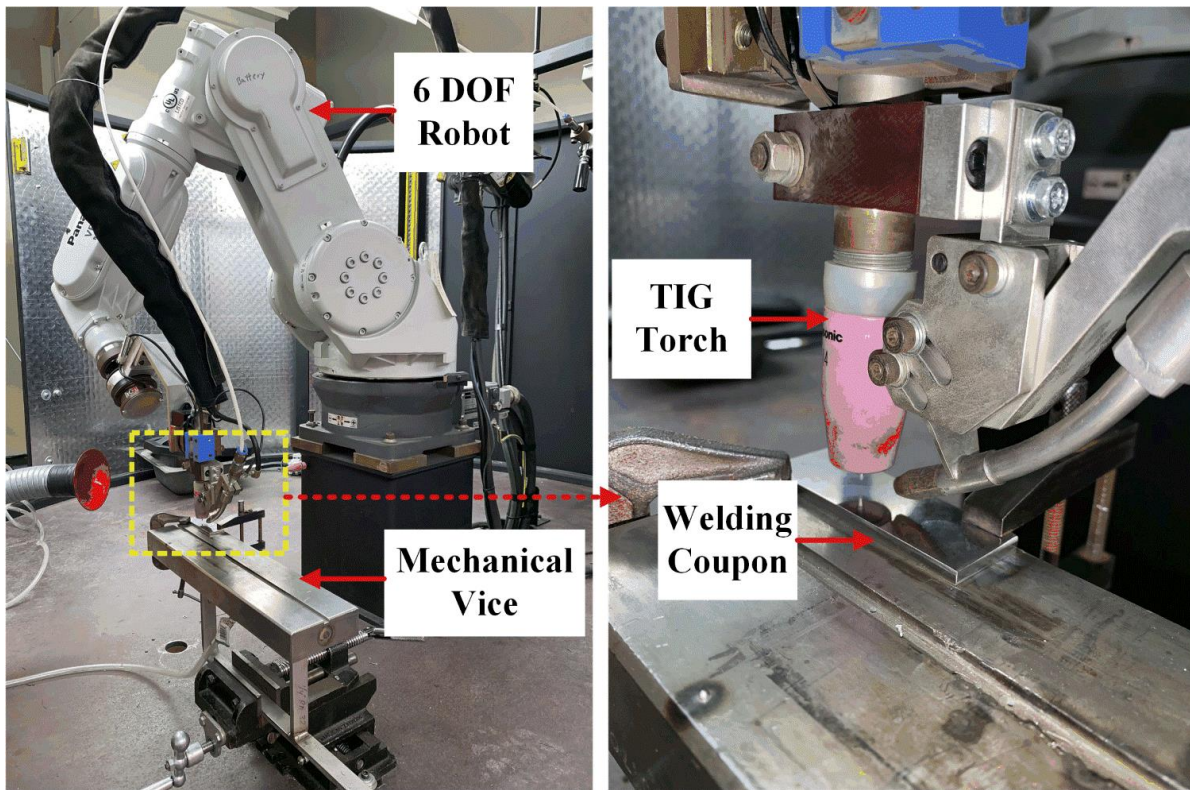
TIG welder fitted with 6 DOF PANASONIC VR-004 robot
